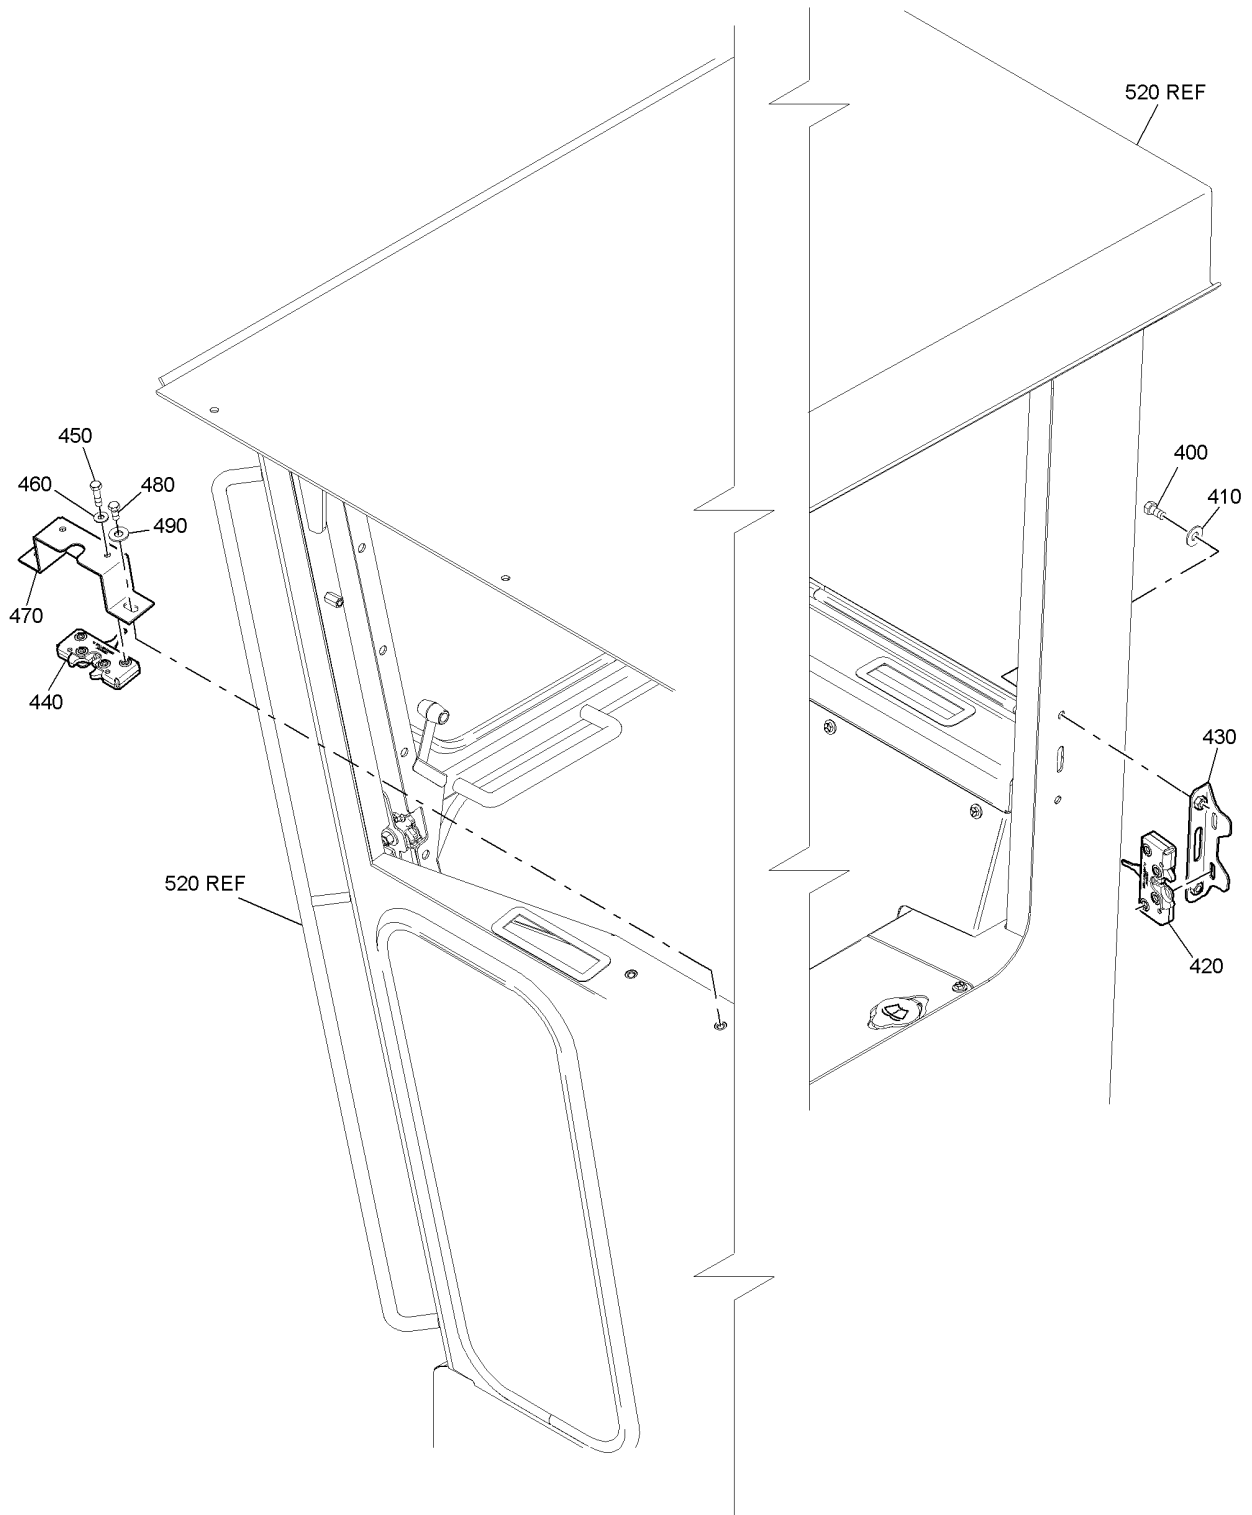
CAB ASSEMBLY (LEFT SIDE VIEW) (SHEET 4 OF 4)
